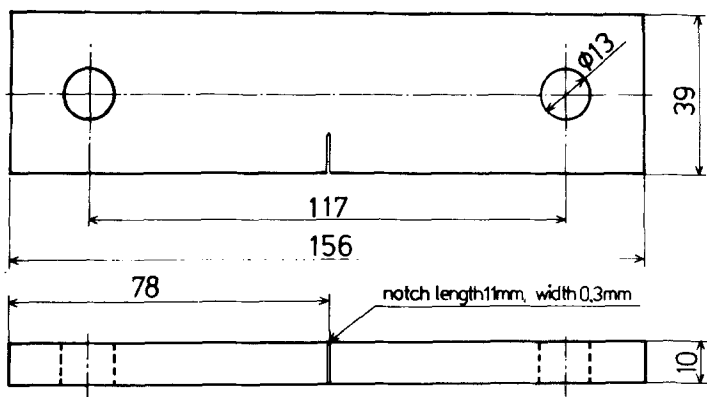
Geometries of the specimen used for the fatigue crack growth study.
